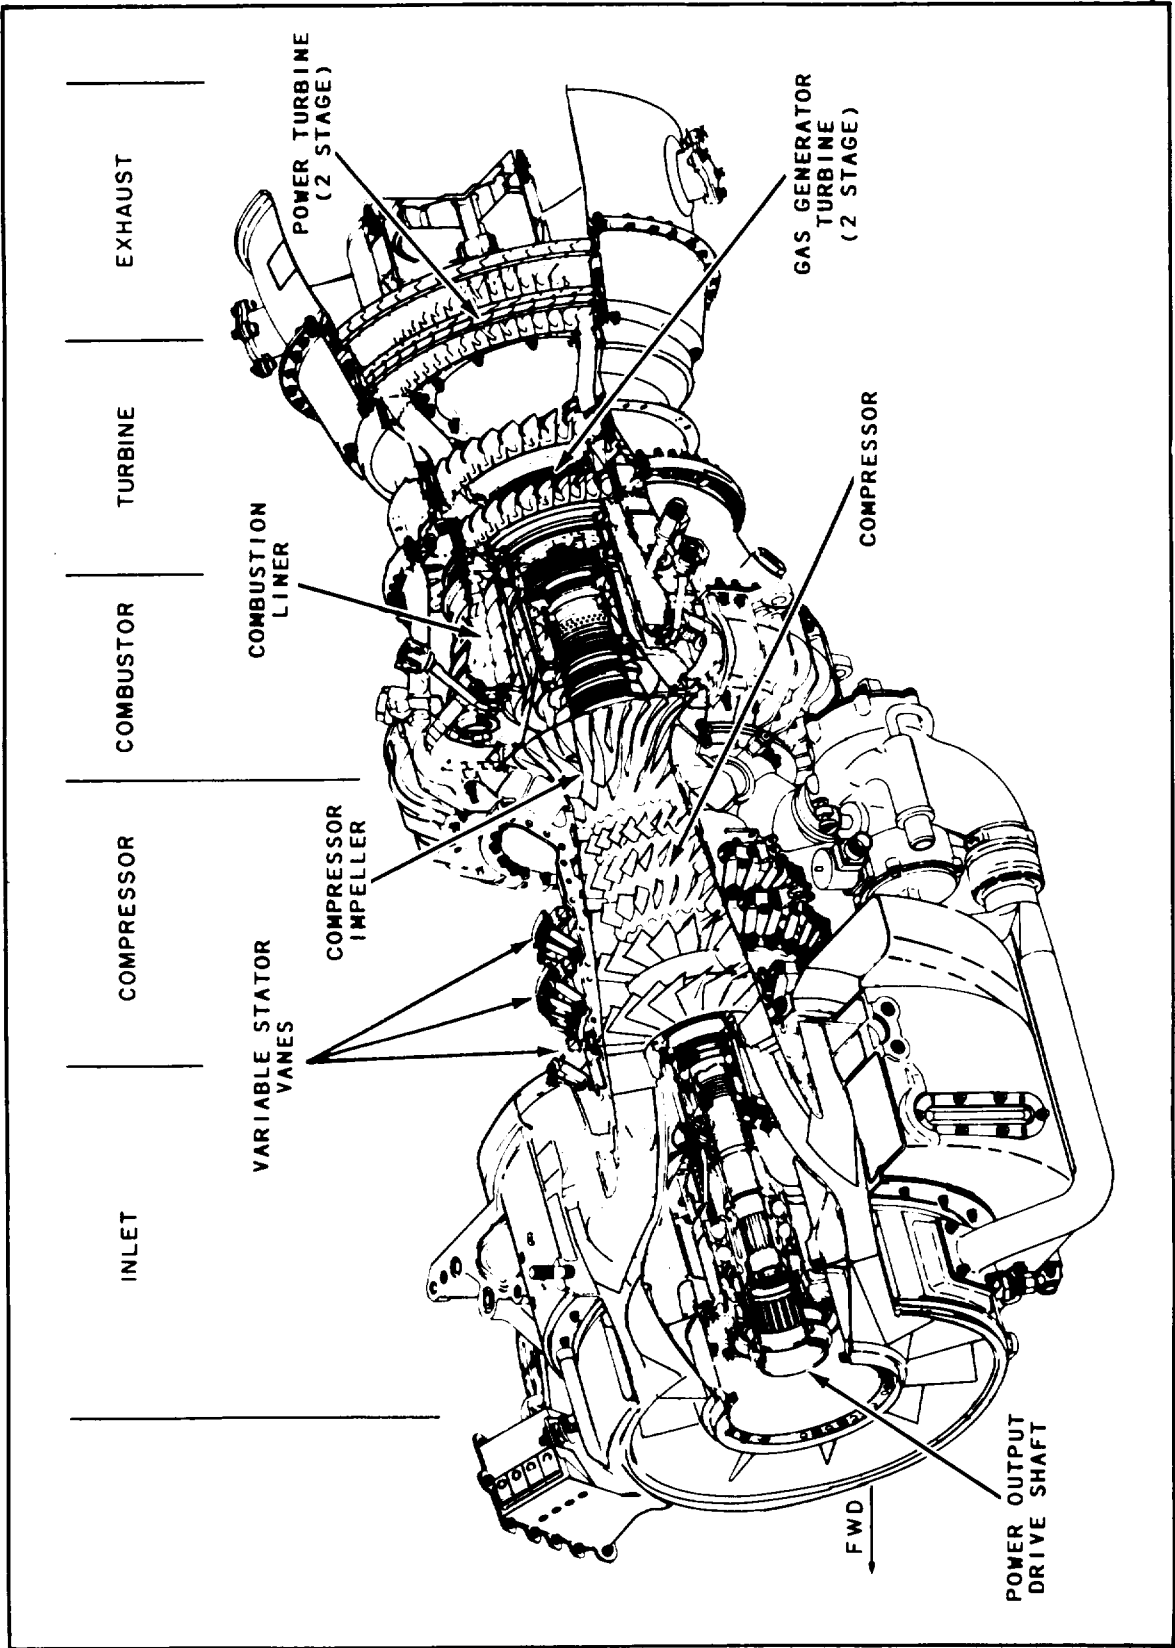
T700-GE-401 turboshaft gas turbine engine (cutaway view).
